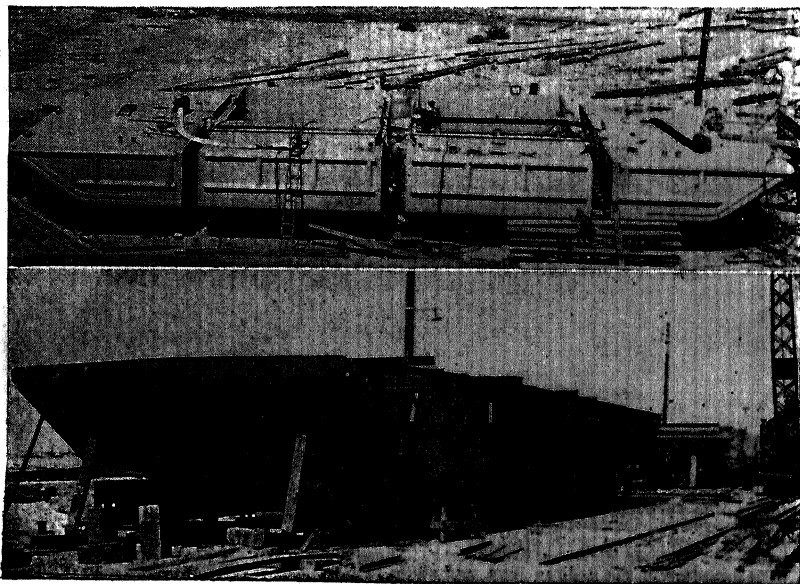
Scow for use in Hawaii. Consists of four water-tight all welded sections to facilitate shipping and make possible assembly in the water.
